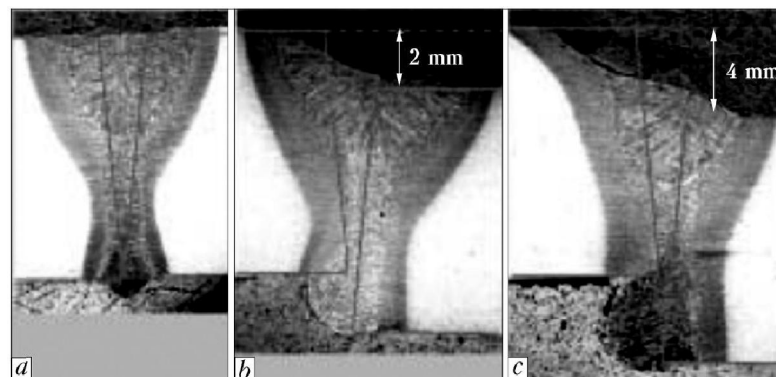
Macro-section of the pipeline steel X52 welded joints 10 mm thick at speed of hybrid of (a) 1.0 and (b, c) 0.8 m/min [194]
